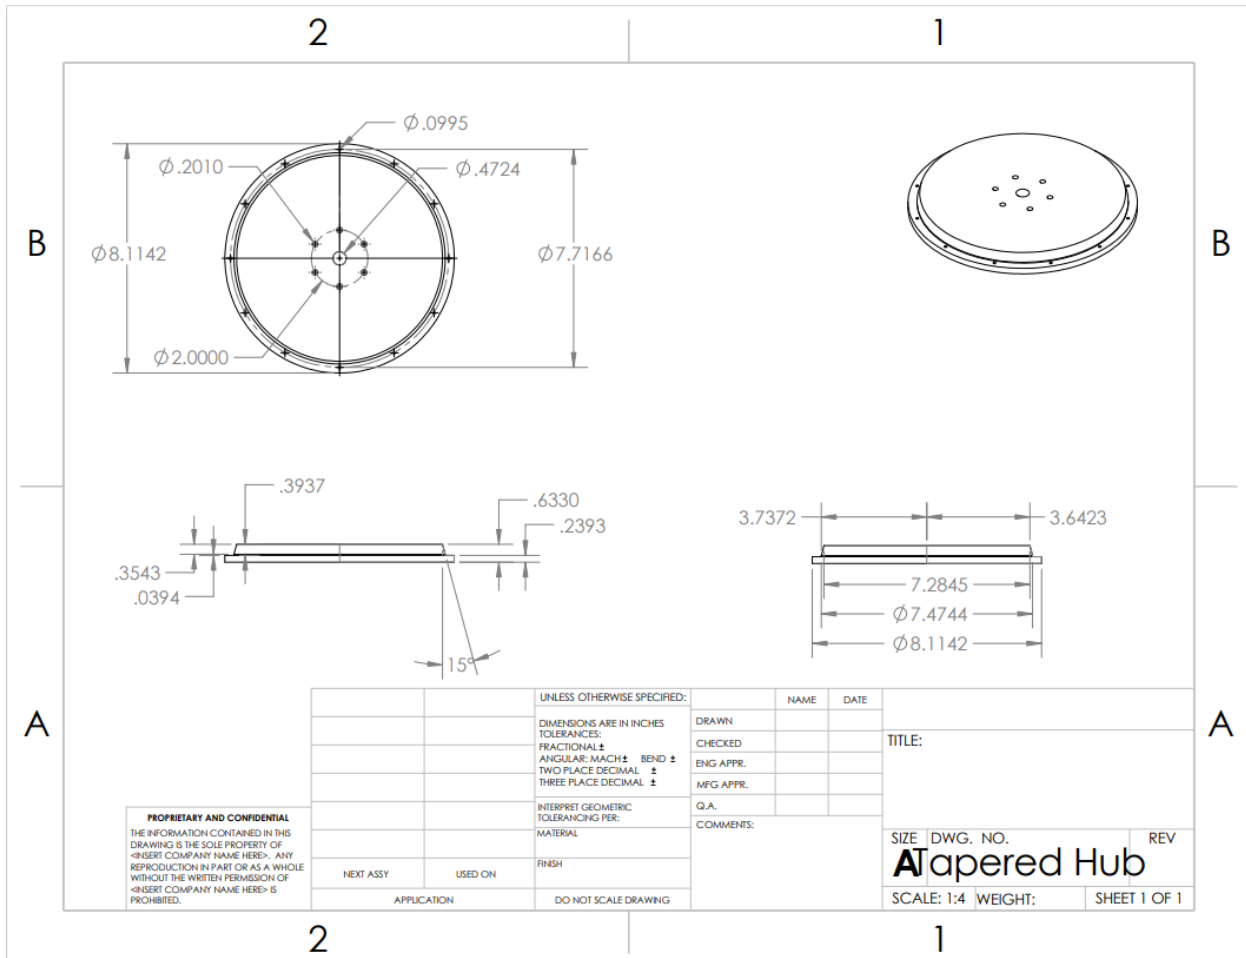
Rotary Encoder Test Fixture Primary Hub “Drawing File”
